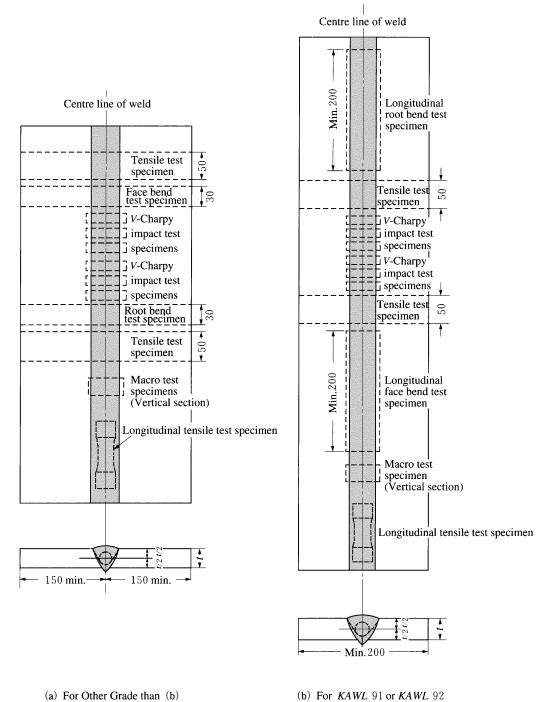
Butt Weld Test Assembly with One-run and Multi-run Technique (Unit: mm, t=Plate thickness)
